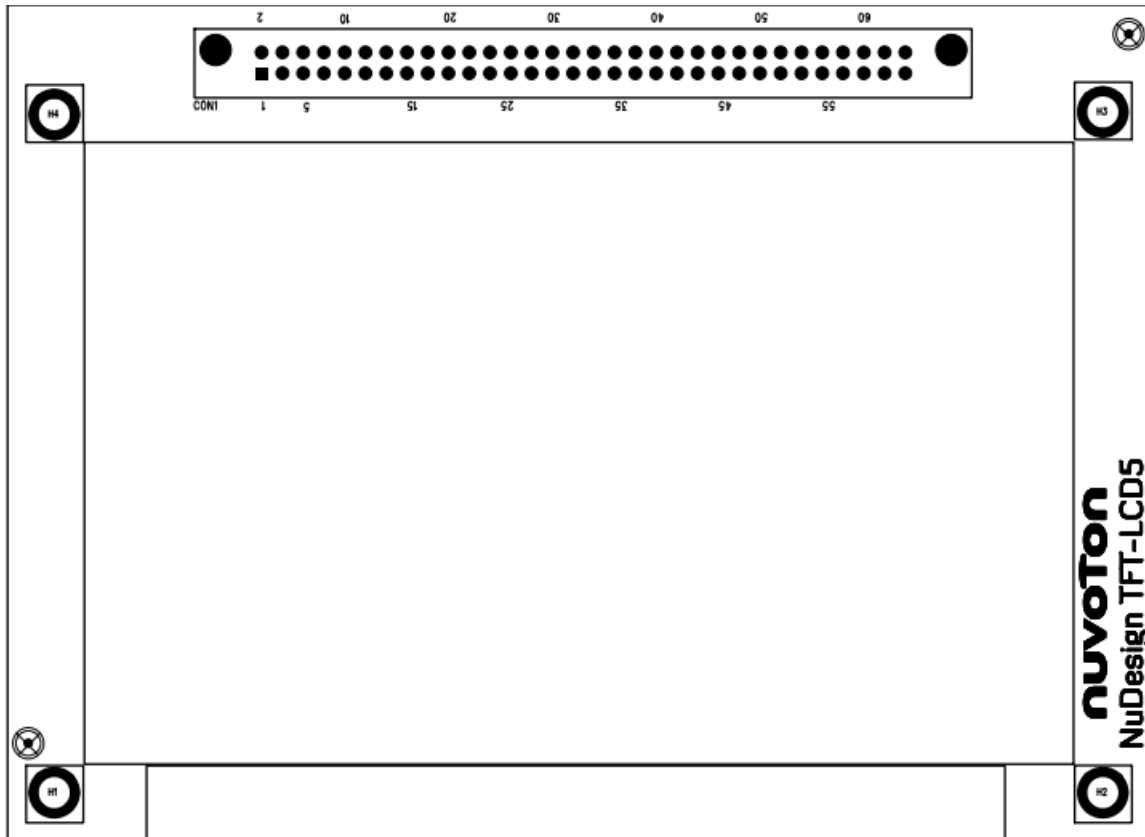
NuDesign-TFT-LCD5 Front PCB Placement
